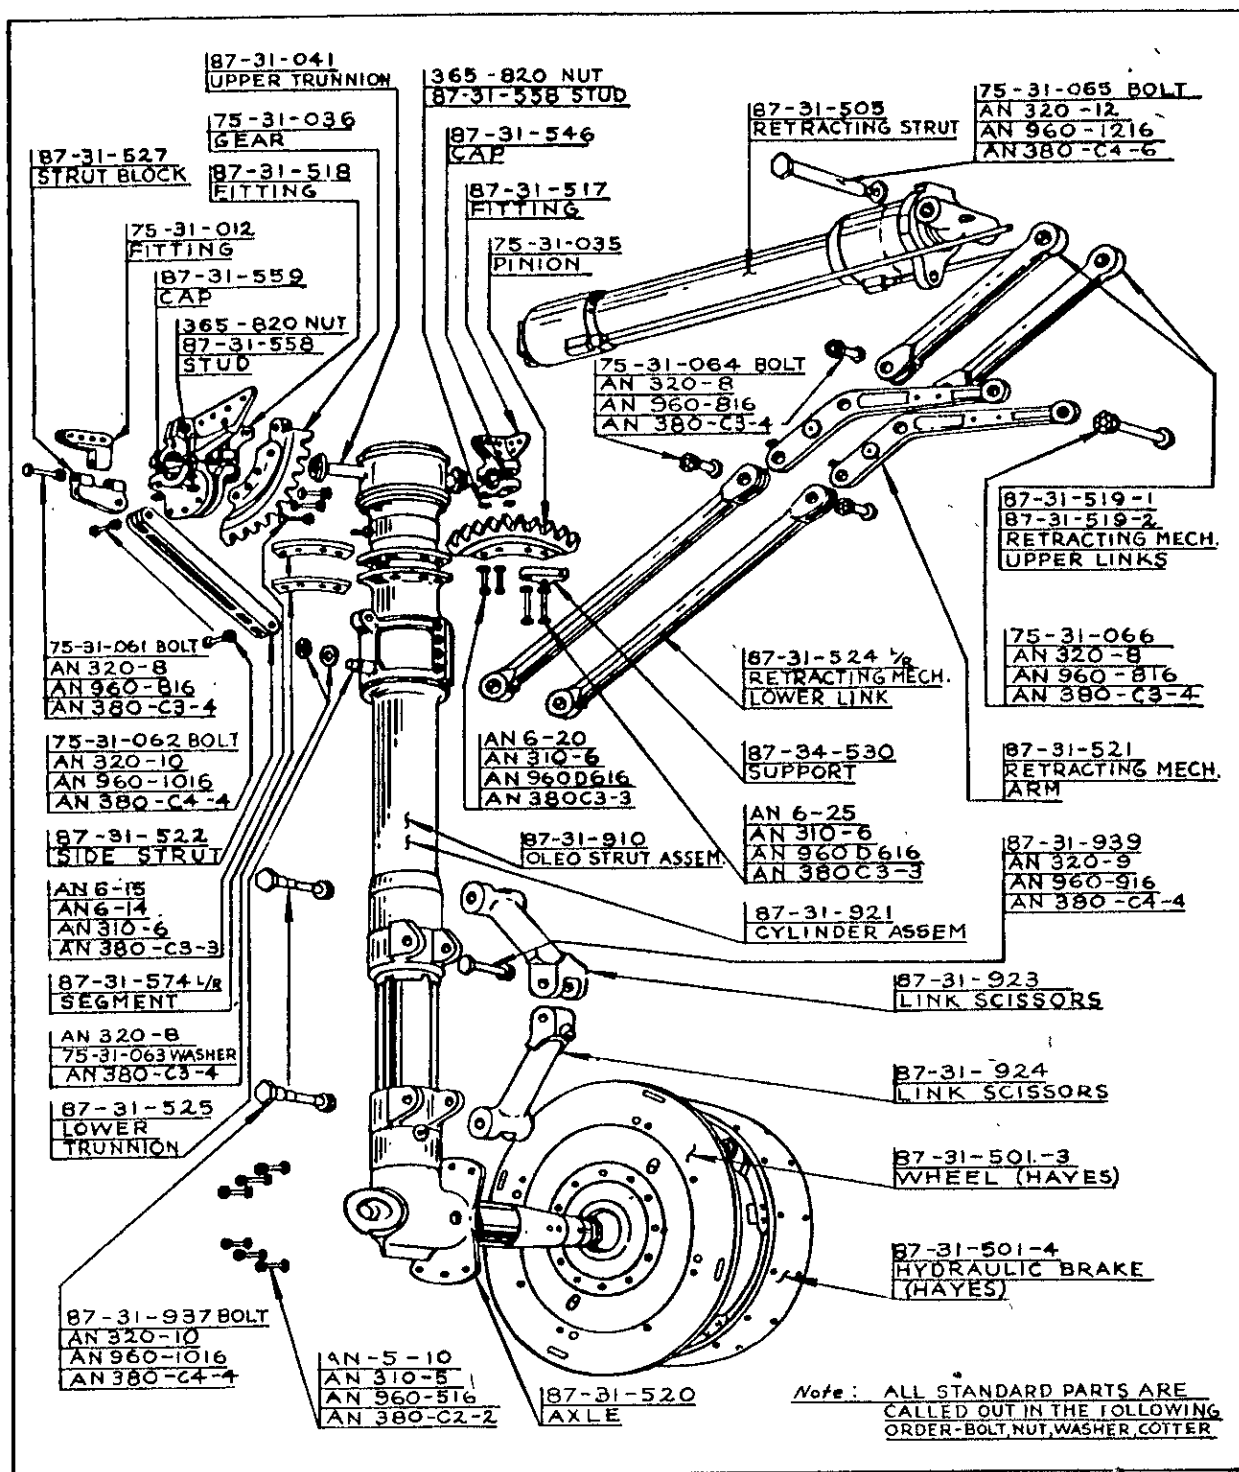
A - Landing Gear Disassembly P-40E, E-1, F
